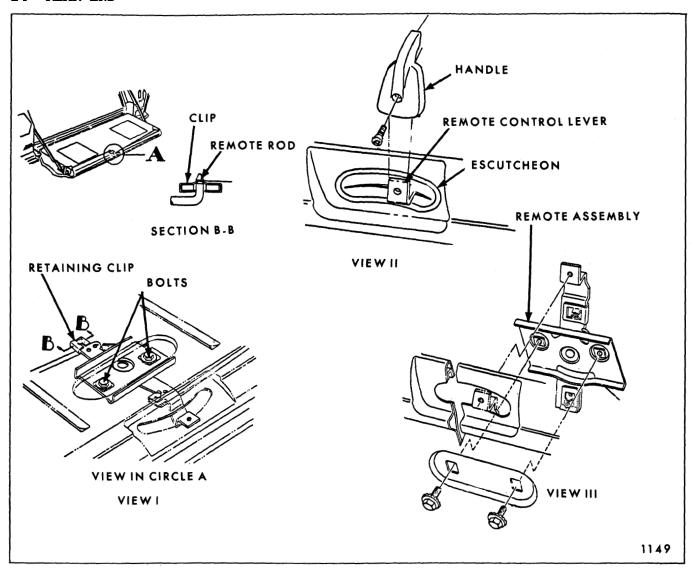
Tail Gate Lock Remote Control Assembly - "X" Body Styles
